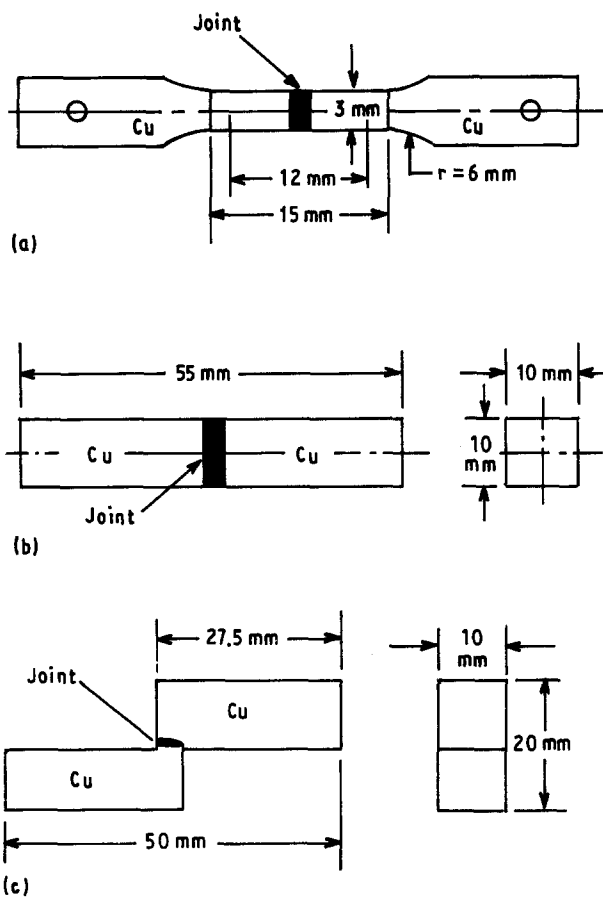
Test pieces for brazed joint mechanical properties. (a) Tensile test piece, (b) impact test piece, (c) shear test piece.
